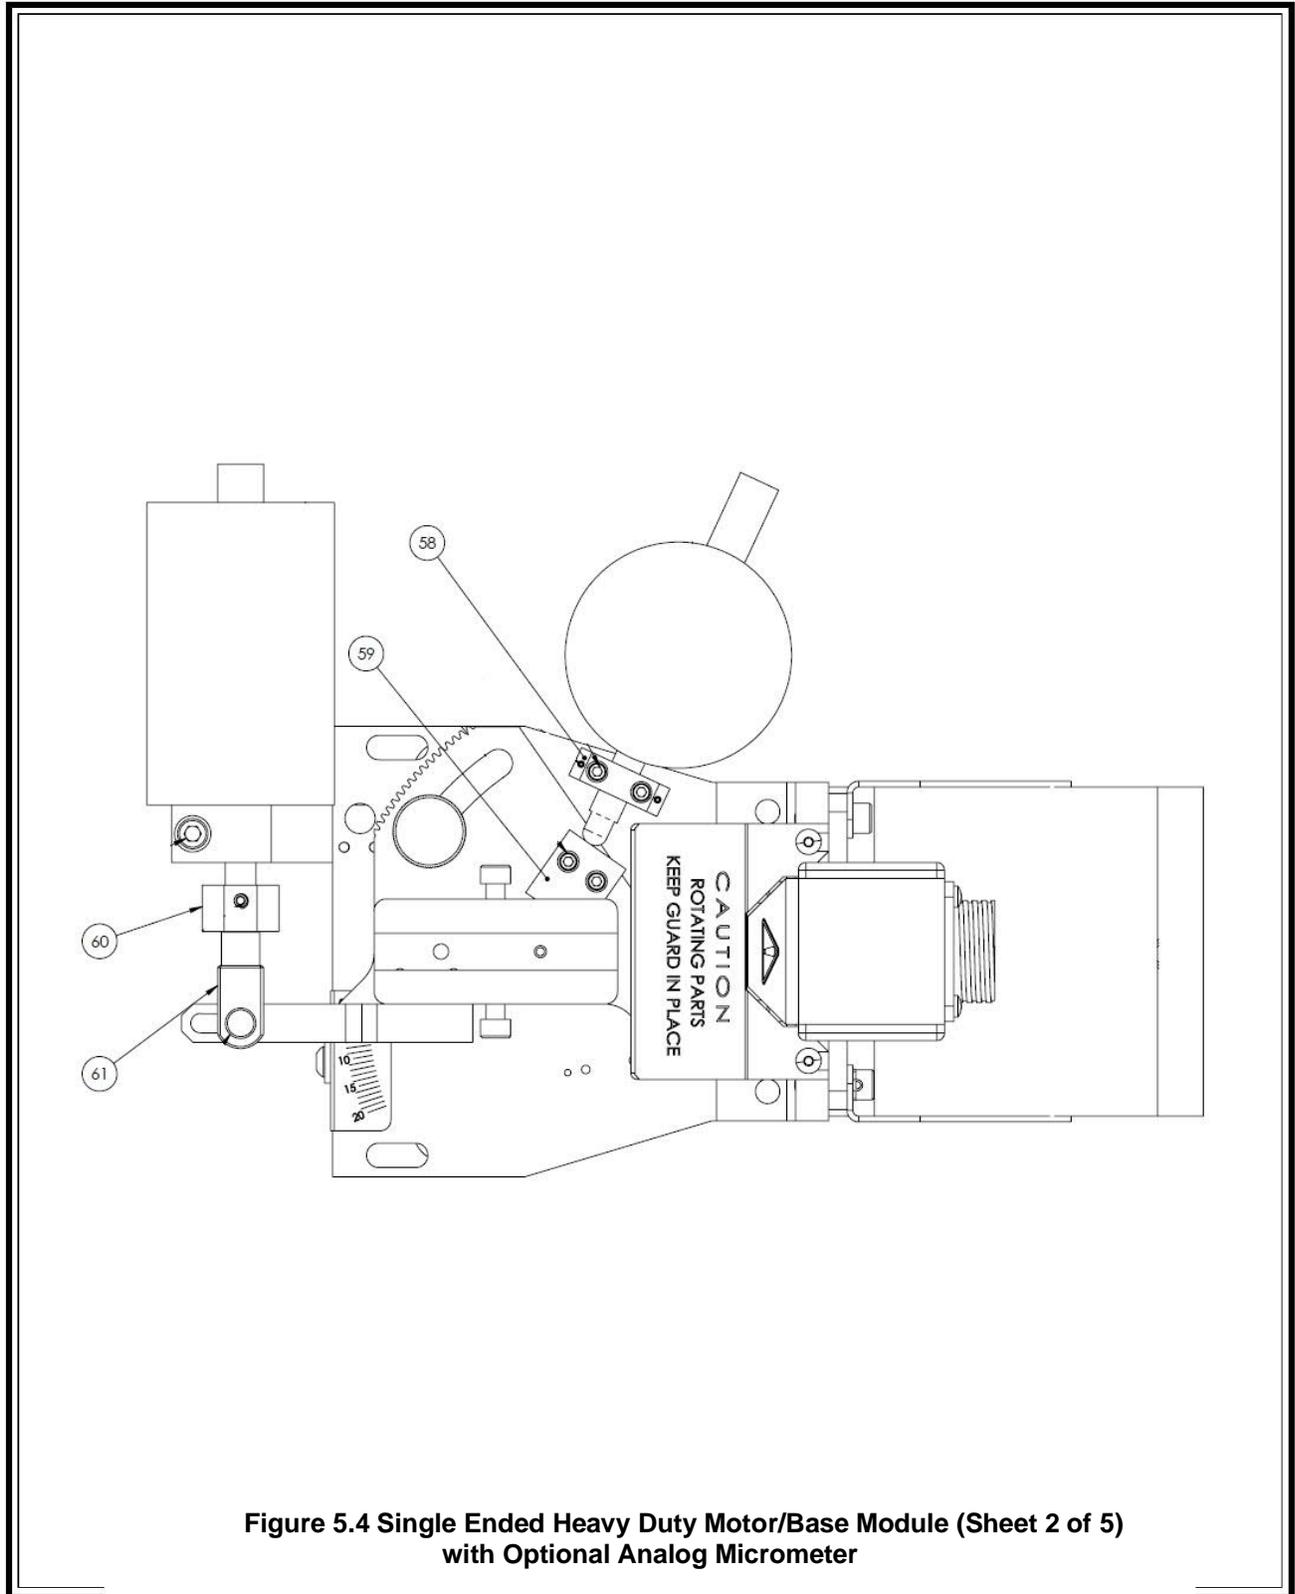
Single Ended Heavy Duty Motor/Base Module (Sheet 2 of 5)
